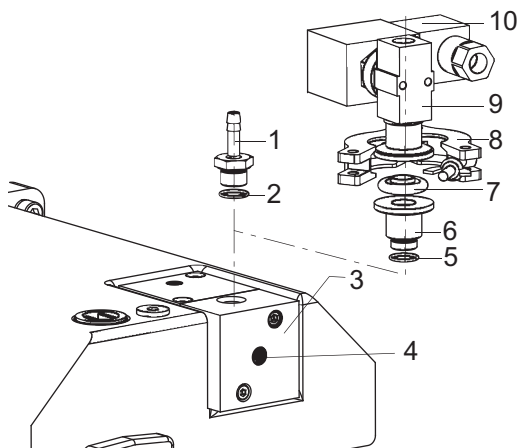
Solenoid valve connection for gas ballast valve (C version)
